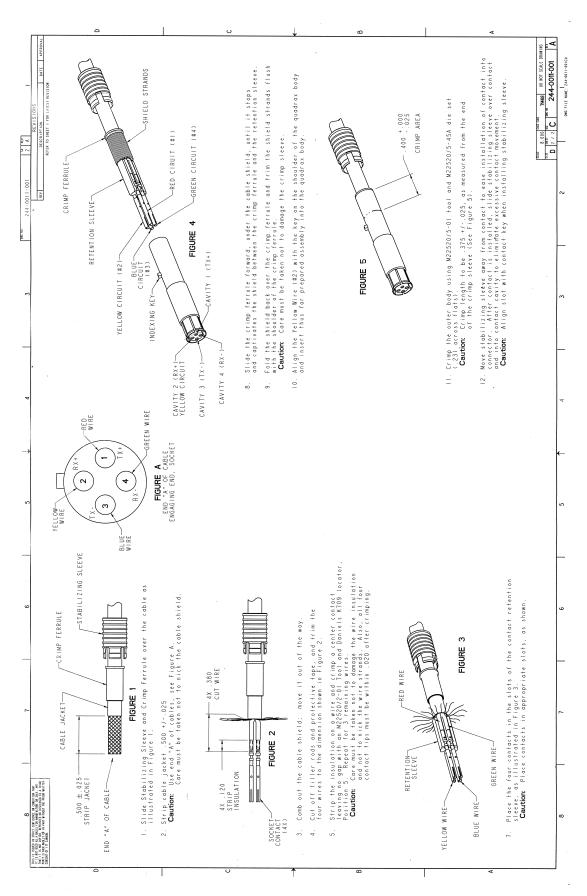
Contact Assembly: Quadrax Pin size 5 special: ITT Cannon 244-0011-001 (Continued)
